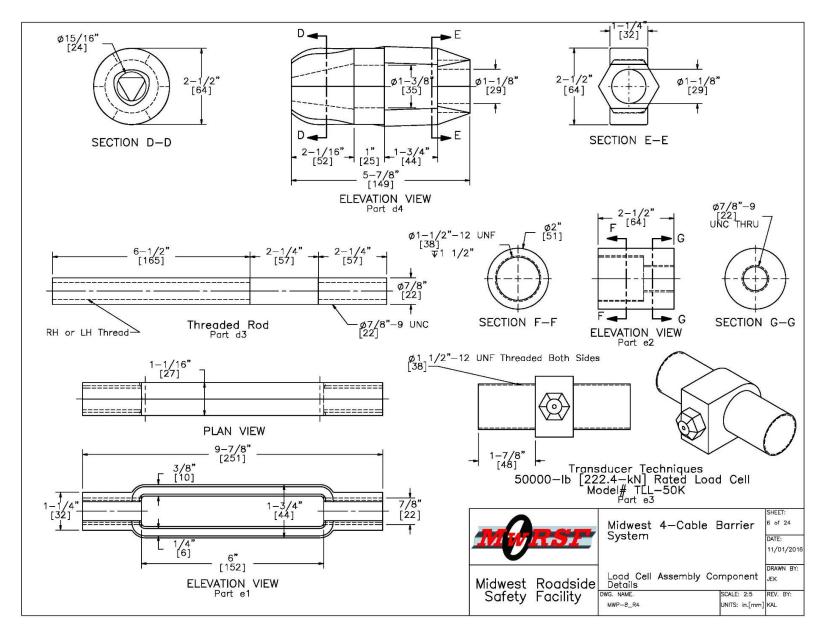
Load Cell Assembly Component Details, Test No. MWP-8
